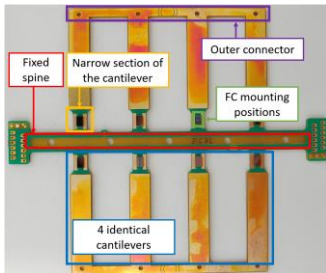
Test vehicle for vibration tests: Printed Circuit Board assembled with 8 custom FC components.
